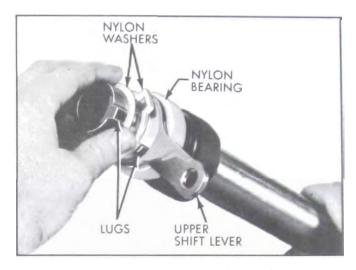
Removing Nylon Washers from Shift Control Shaft
